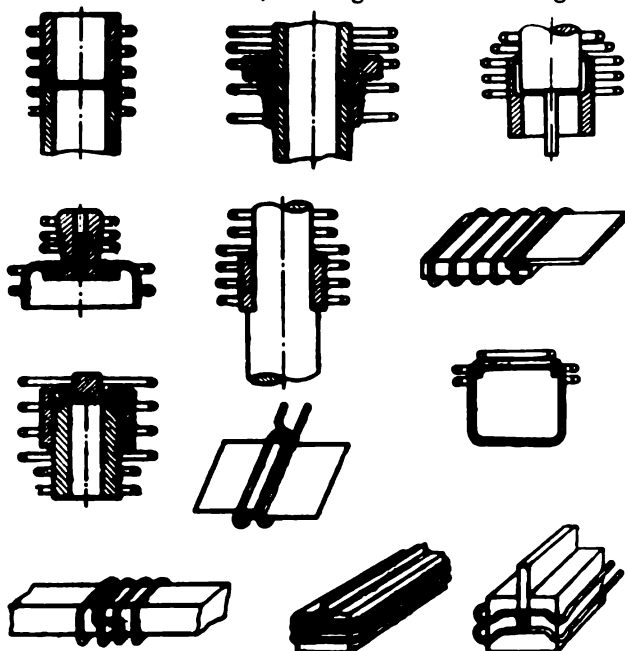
Diagrammatic representation of the inductor coil and the solder during soldering of oddshaped parts
